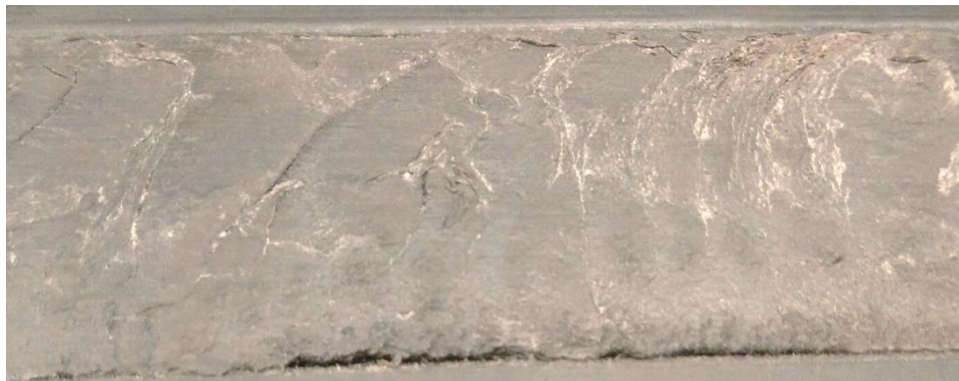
Middle section of weld produced by hybrid tool preheated to 150 °C
